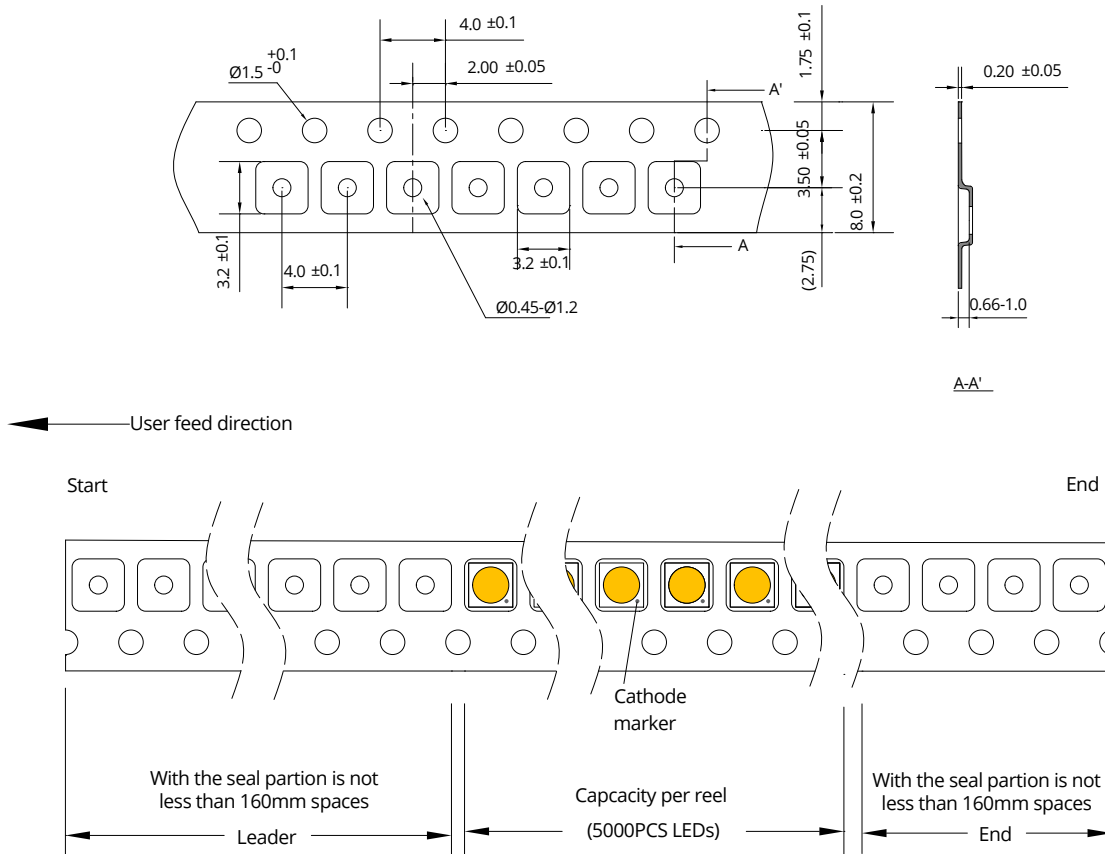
Pocket tape dimensions for LUXEON 3030 HV.
